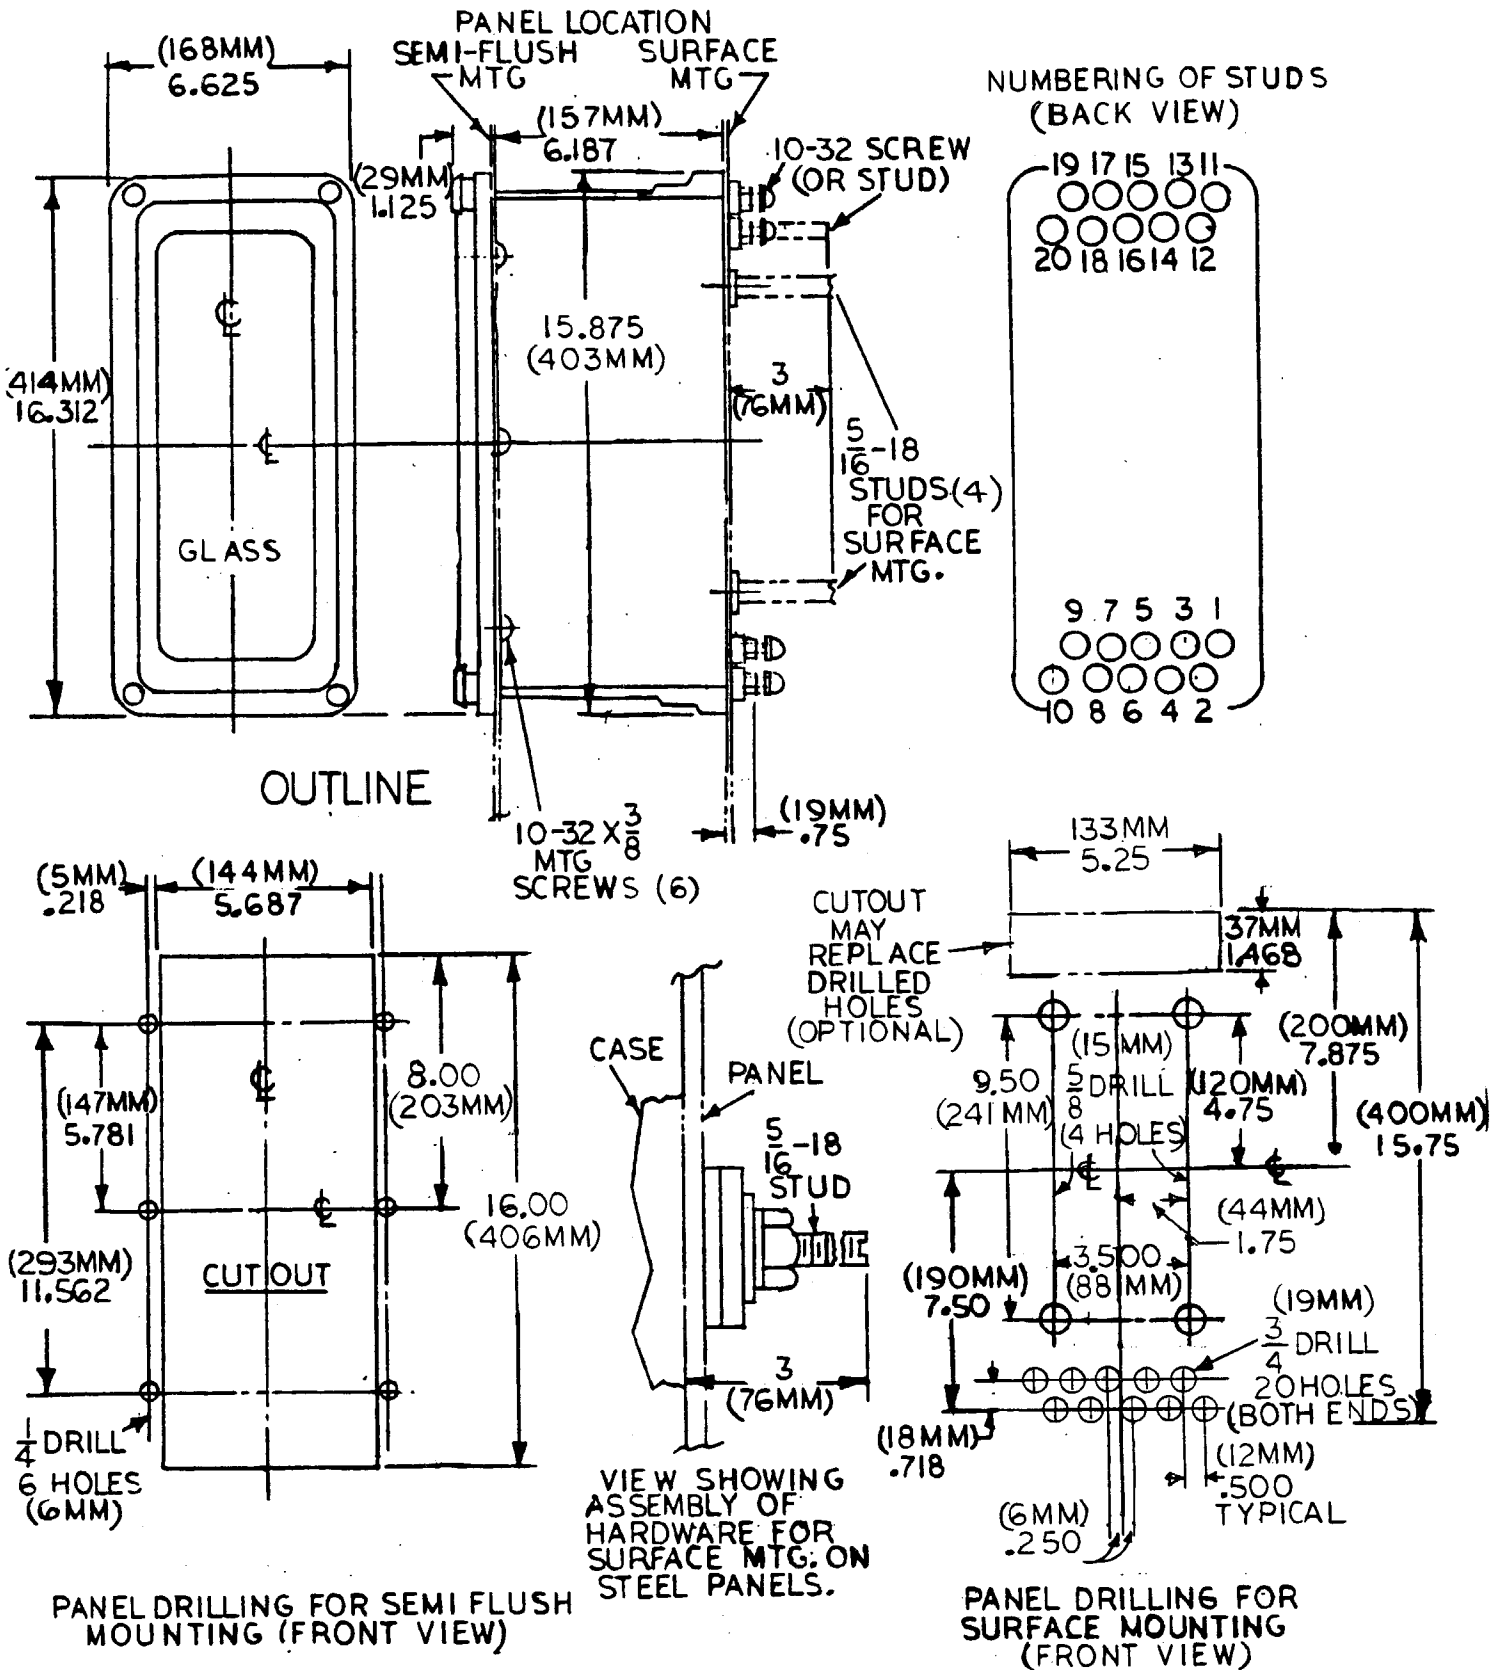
(6209274-0) Outline and Panel Drilling Dimensions for the IBCG99B(-)A Relay
